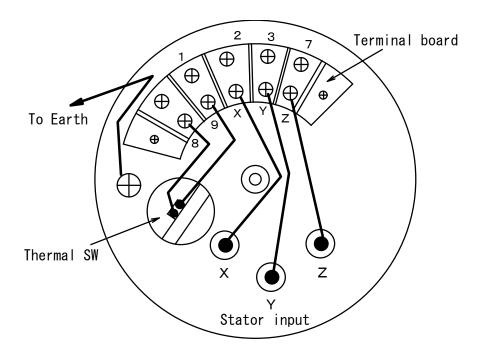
LOW VOLTAGE CABLE TERMINAL BOARD (TYPE1)
